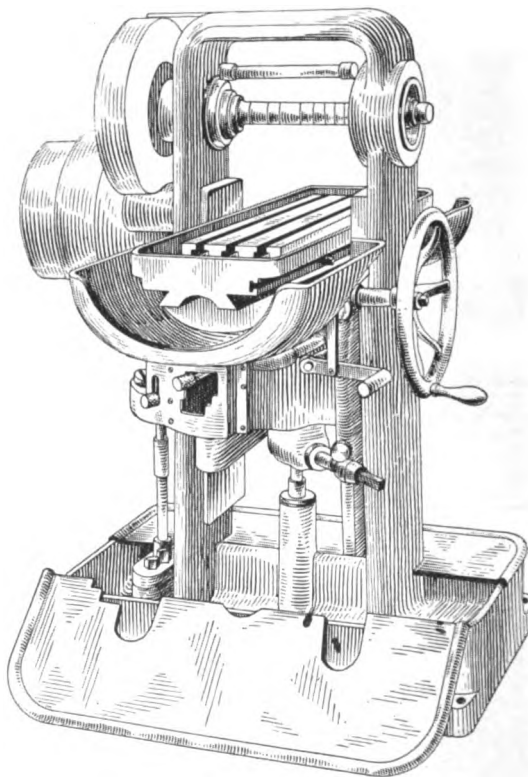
MILLER ON WHICH THE SWORD BAYONET MILLING WAS PERFORMED
